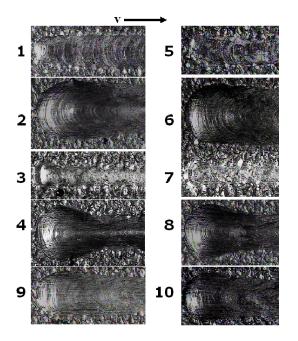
Images of the welds surfaces for factorial experimental plan weld 1-4 with $\delta = 0$, welds 5-8 with $\delta = -2 mm$, welds 9-10, reply $\delta = -1 mm$
